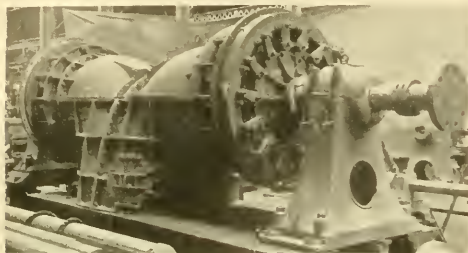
A TWIN TURBINE WITH OUTSIDE GATE MECHANISM FOR TOP INLET CASING
